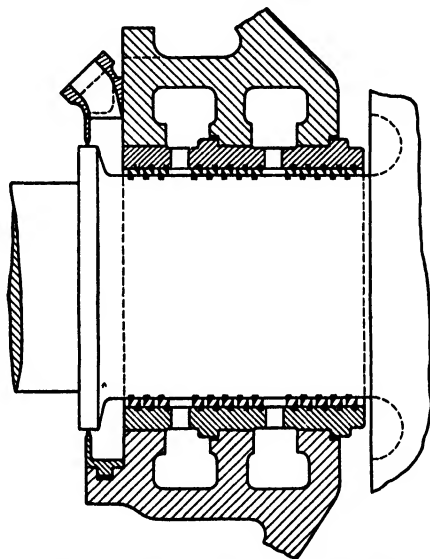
Shaft-end gland showing gland pockets and labyrinth packing.
